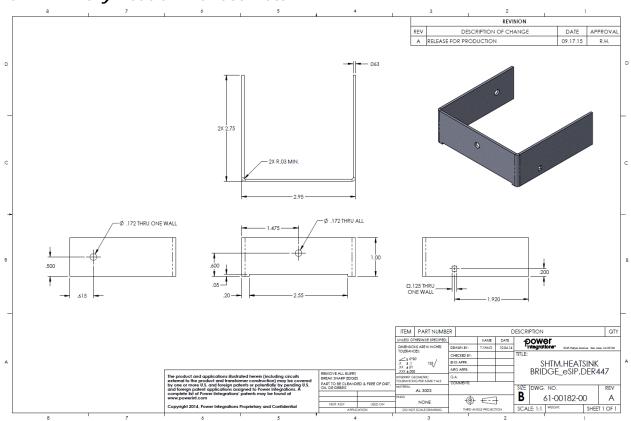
Primary Heat Sink Sheet Metal Drawing.
